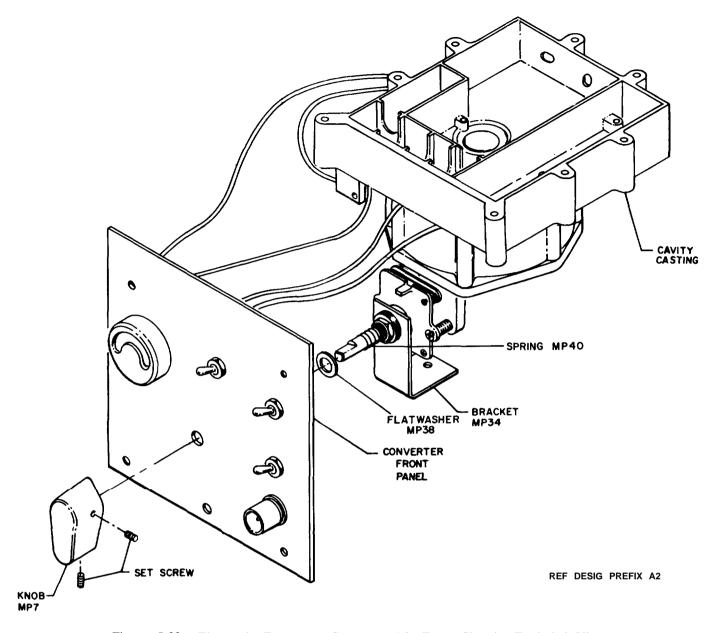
Electronic Frequency Converter A2, Front Chassis, Exploded View
